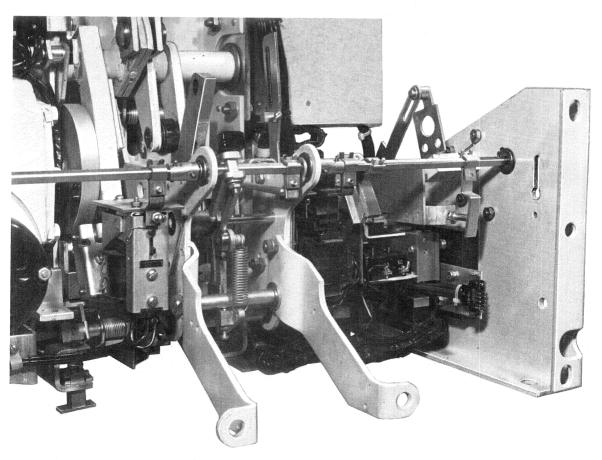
Rear view of front frame showing mounting of the flux shift trip device.
